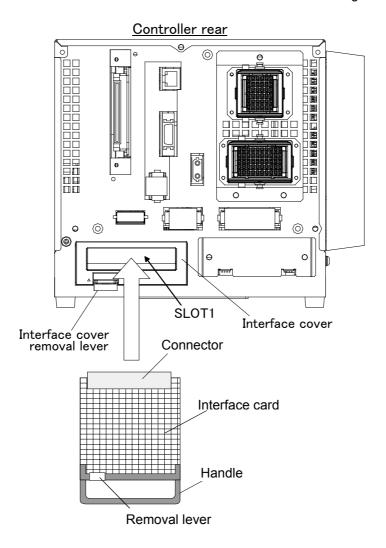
Mounting of the CC-Link interface card (CR1D controller)
